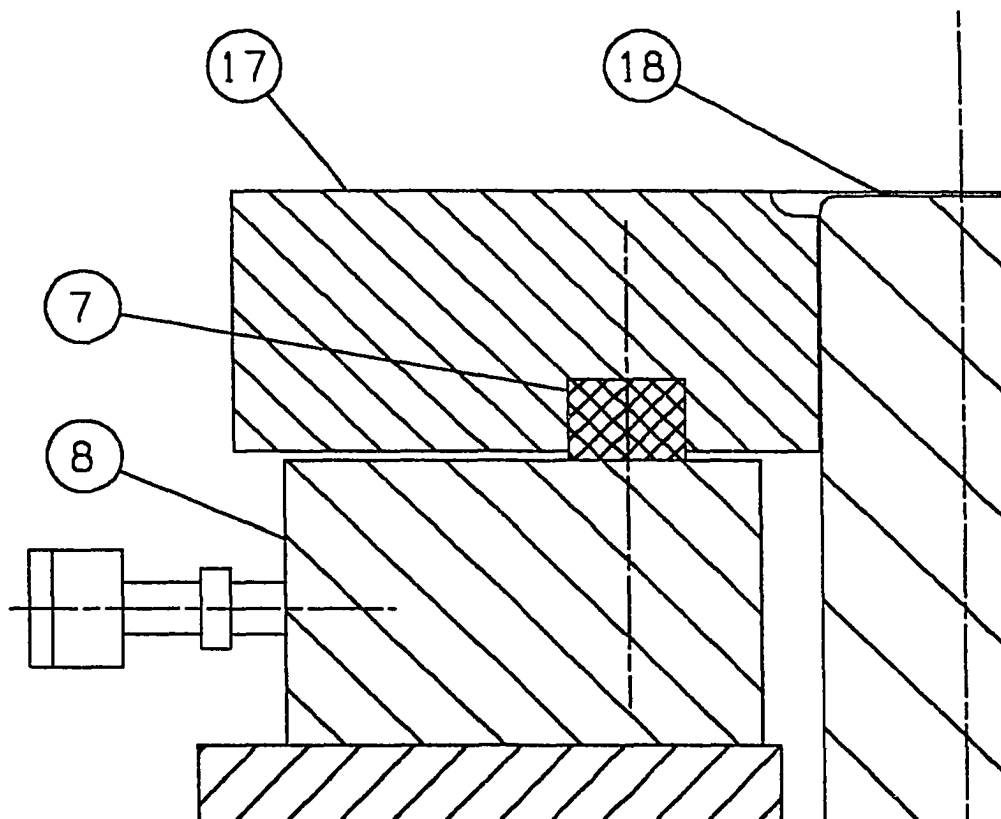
Second stage blankholder assembly, and the positioning of the "button" loadcell for blankholder force measurements.
